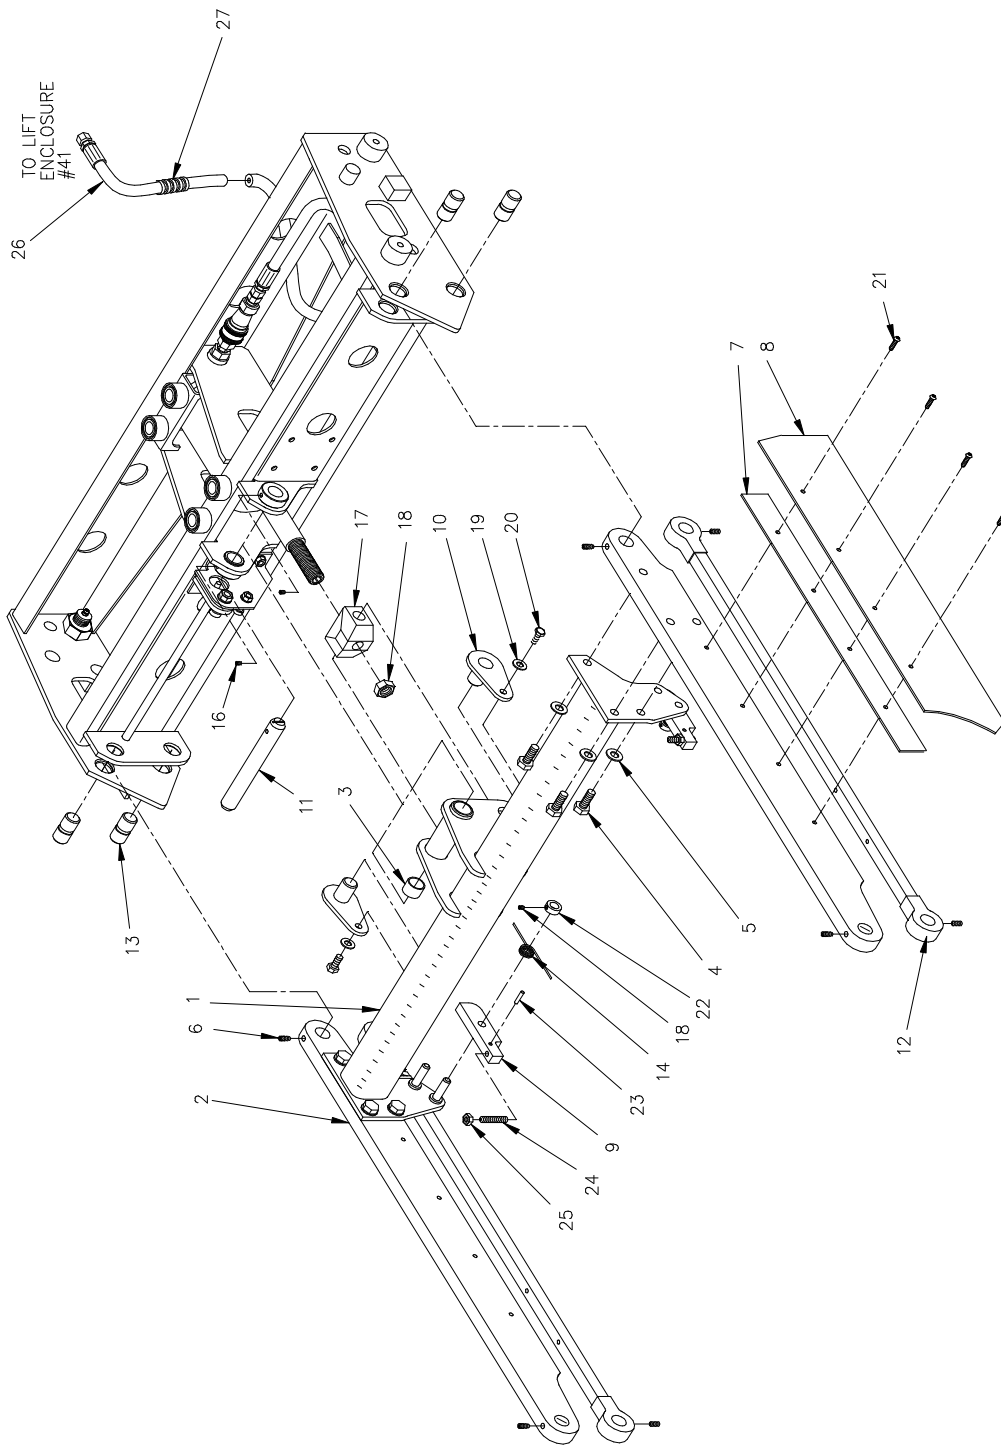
TRAVELING FRAME ASSEMBLY
